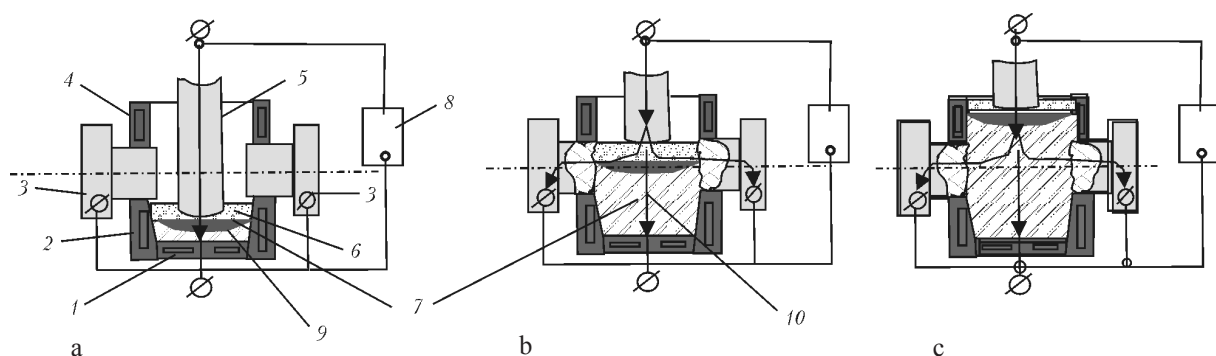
Diagram of the process of ESCM of flange stop valves: a) initial stage; b) melting-on stage; c) final stage; 1) baseplate; 2) solidification mould (lower part); 3) nipples with the flanges; 4) the solidification mould (upper part); 5) the consumable electrode; 6, 7) the slag and metal pools, respectively; 8) power source; 9) the melted part of the blank.
